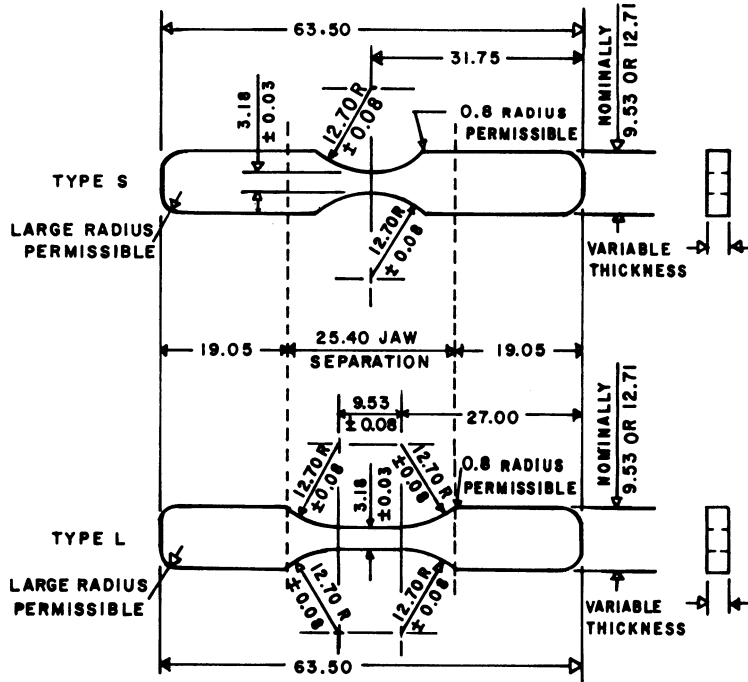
A Mold Dimensions of Types S and L Tension-Impact Specimens (Dimensioned in Millimetres)
